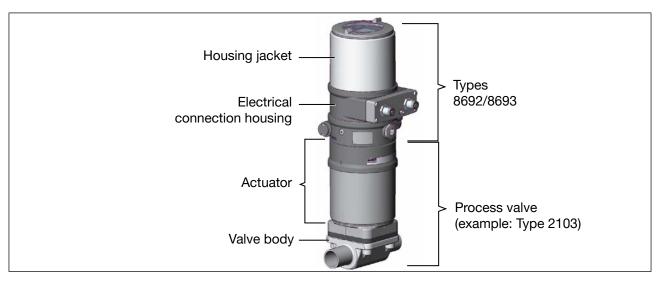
Installation of Type 8692/8693 on process valves, example showing Type 2301
